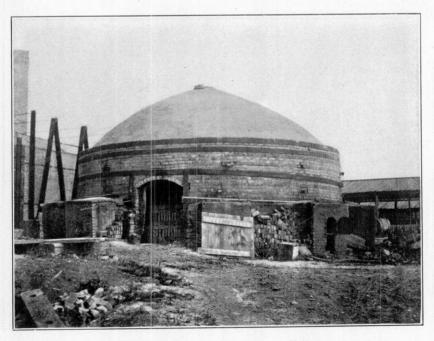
Circular down draft kiln, Riverside Brick works, Haleyon.
